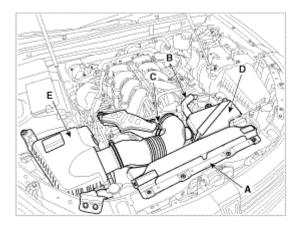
Identifying Air Duct, Breather Hose, Clamp, Chamber Air Cleaner And Air Cleaner
